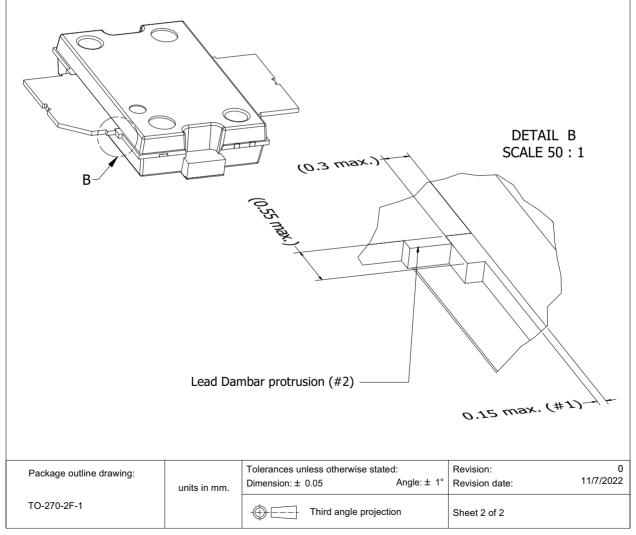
Package outline TO-270-2F-1 (sheet 2 of 2)
